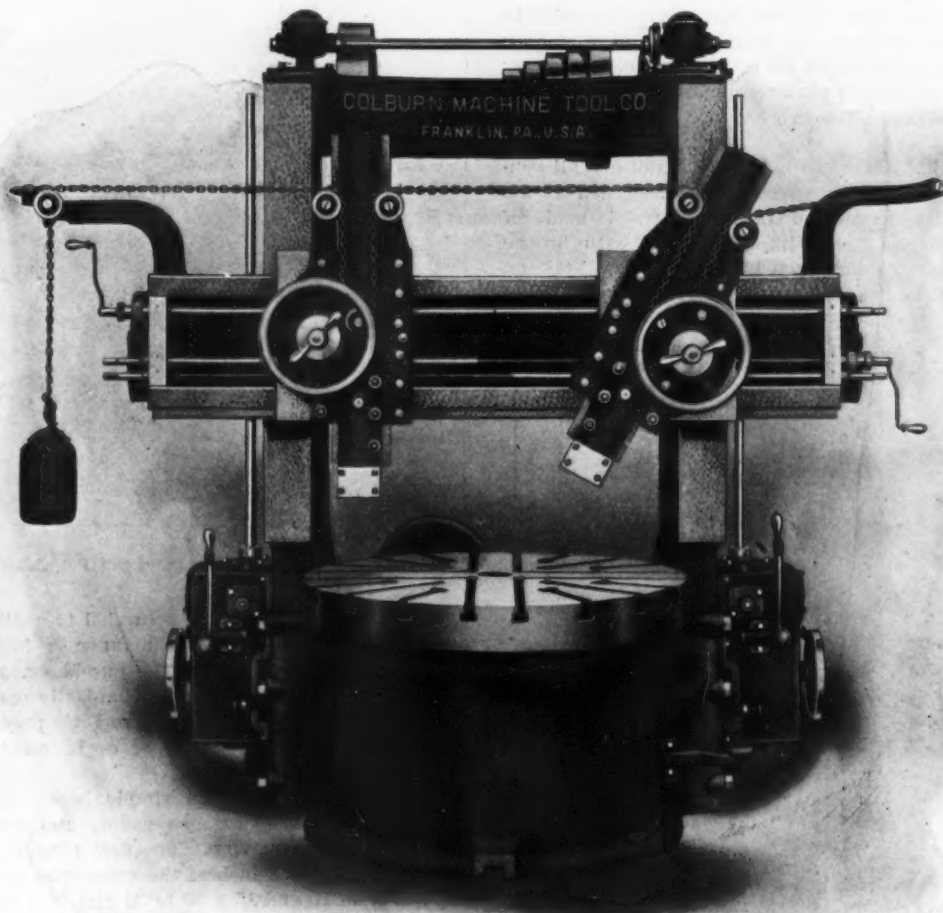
Front View of the Colburn Boring and Turning Mill.
